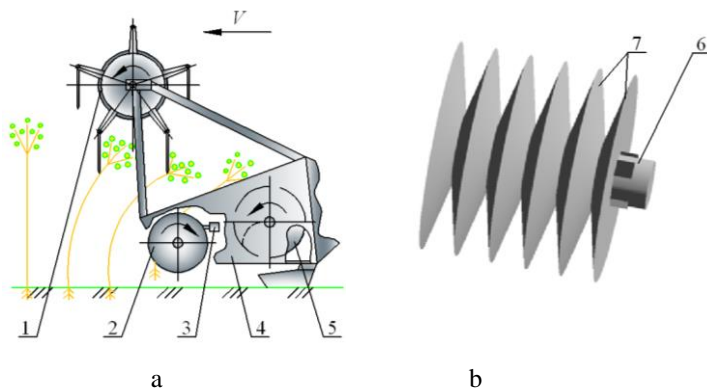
Scheme of grain platform body with conical-disk flax pulling mechanism (a) and its fragment (b): 1 – reel; 2 – flax pulling mechanism; 3 – cleaning bar; 4 – grain platform body; 5 – auger; 6 – shaft; 7 – conical disks
